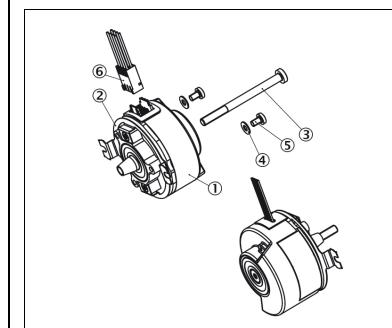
Assembly figure of SRS50S/SRM50S, conical shaft, spring plate
